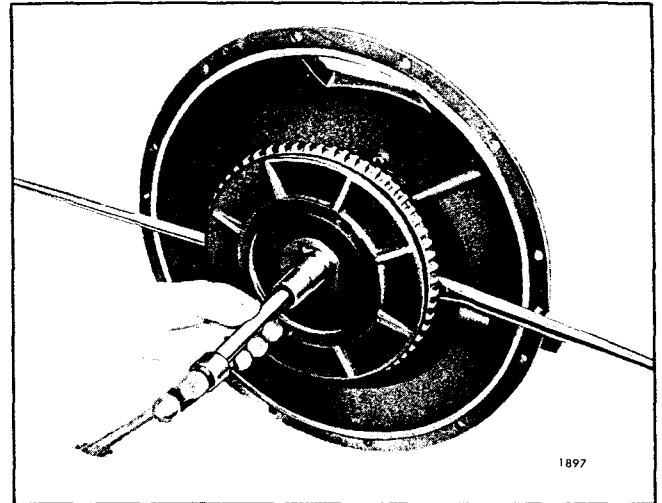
Removing Clutch Assembly from Clutch Drive Shaft
